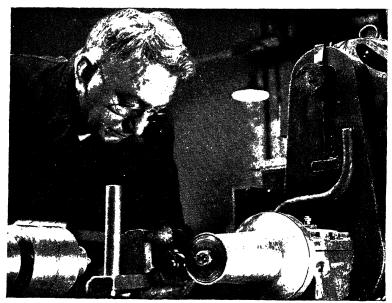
Spinning thin metal. Note the roller forming tool forcing the metal against the form. (Westinghouse.)
